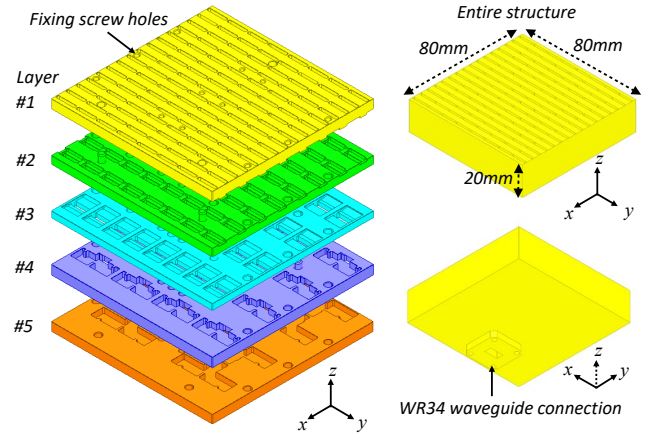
Layered view of the fabricated prototype which was realized with five separate machined aluminum plates joined with screws.
